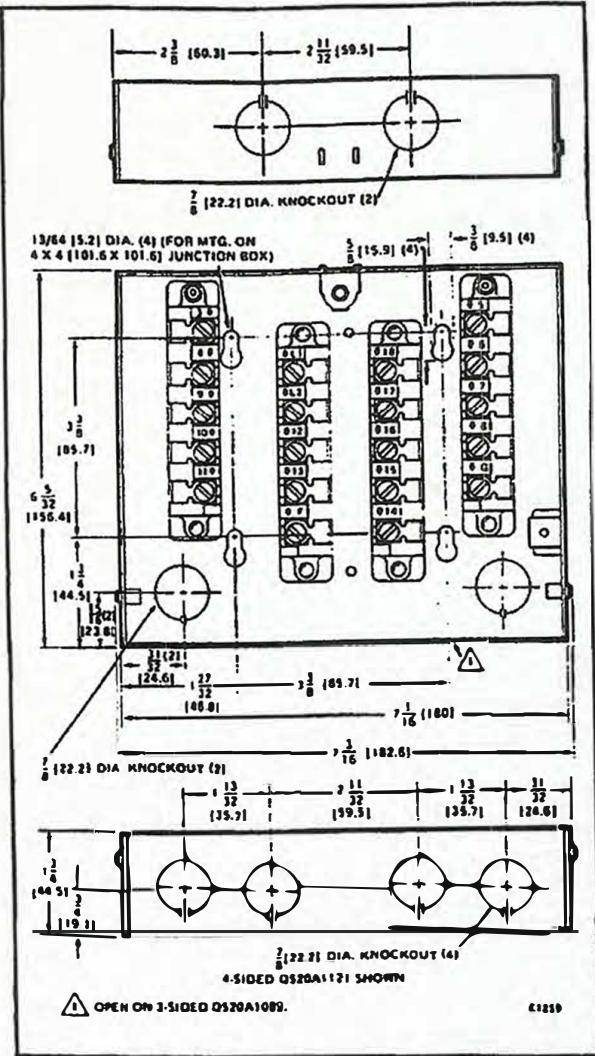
MOUNTING DIMENSIONS OF THE Q520A SUBBASE IN in. [mm SHOWN IN BRACKETS].
